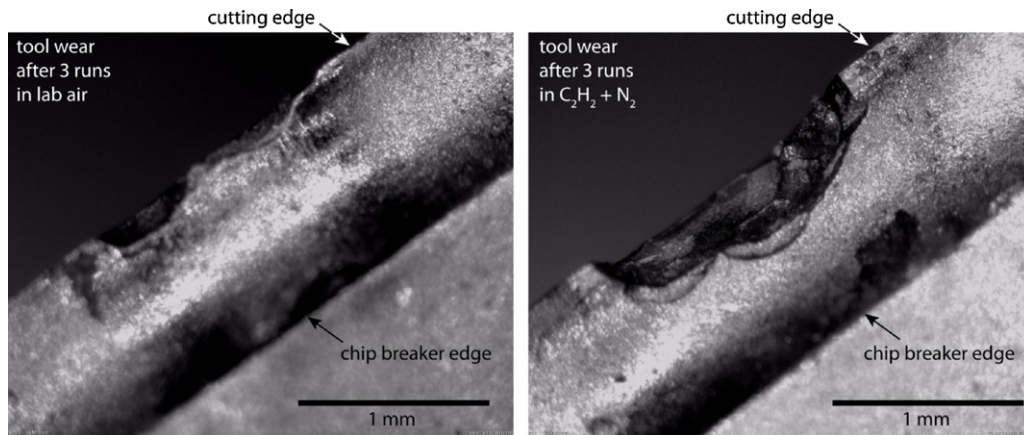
Representative optical images showing damage on the tool cutting edge after three workpieces in lab air (left image) and in nitrogen-shielded acetylene (right image). Tool damage was greater when machining was performed in the hydrocarbon environment.
